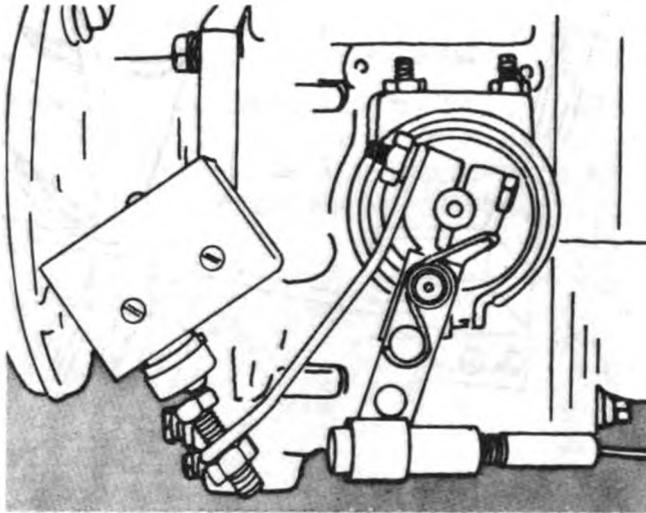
The Fuel Pump Switch Installed Onto The Fuel Pump.
